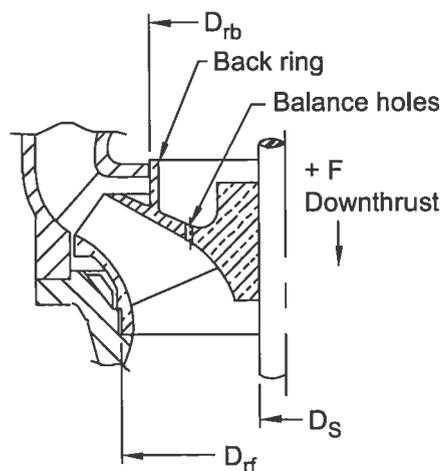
Enclosed impeller with back ring and balance holes
